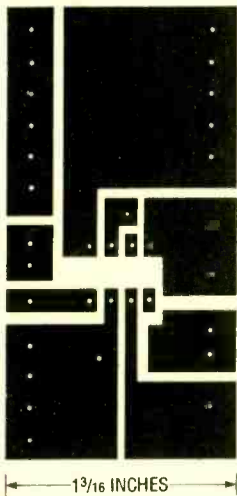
If you wish to build a Ring Converter on a piece of printed-circuit board, use this pattern to etch the foil.
